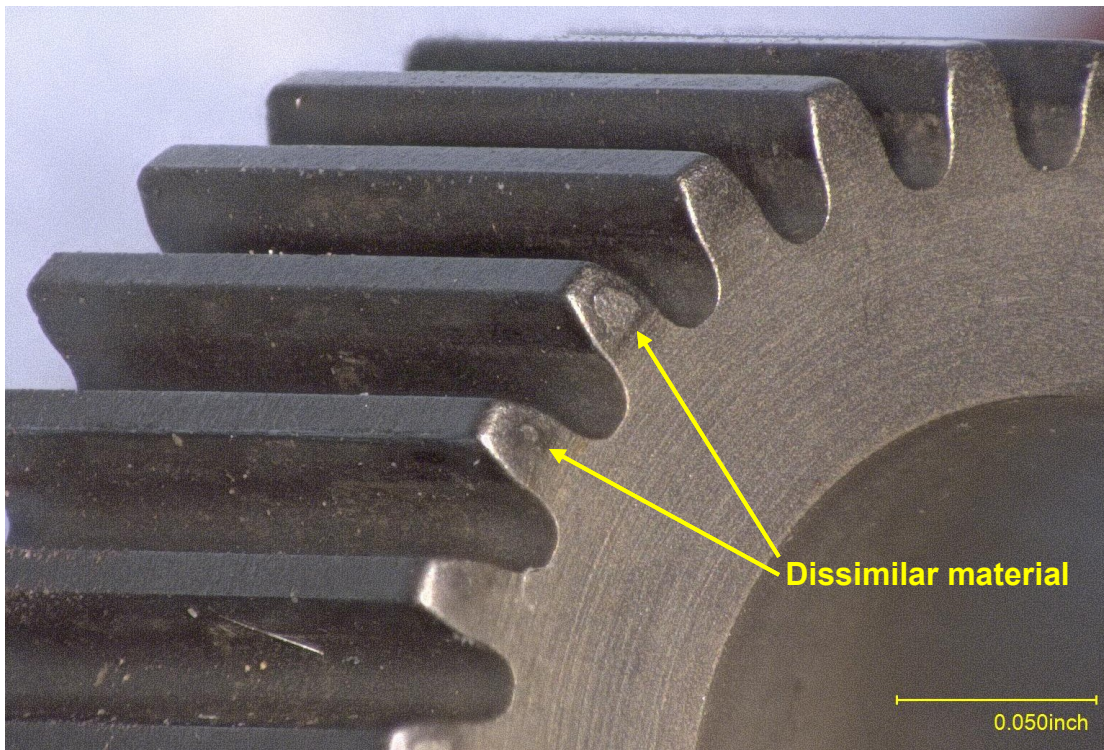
The output gearshaft gear teeth, from a 45° angle.
